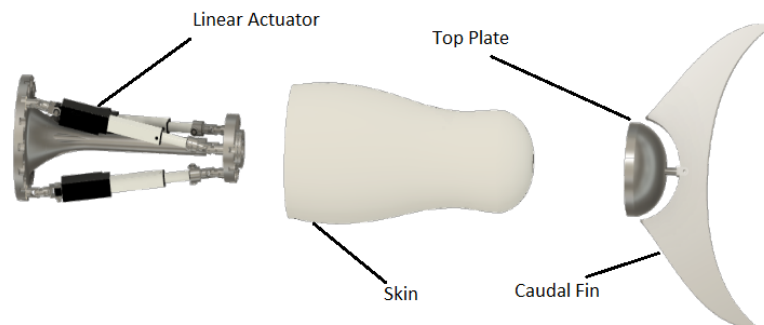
CAD ASSEMBLE OF THE DORSAL FIN
